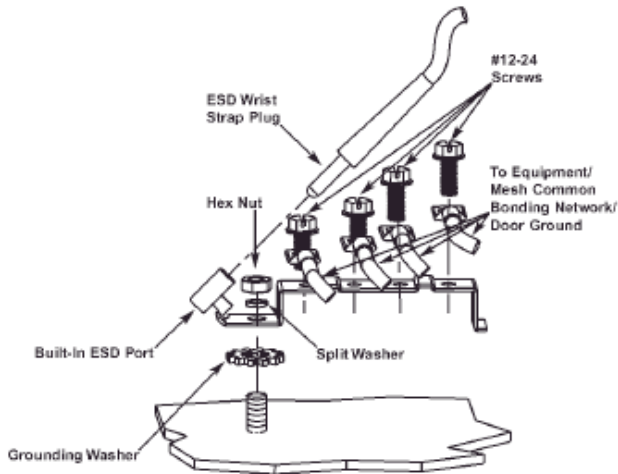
Exploded view of STRUCTUREDGROUND™ Enclosure Kit
